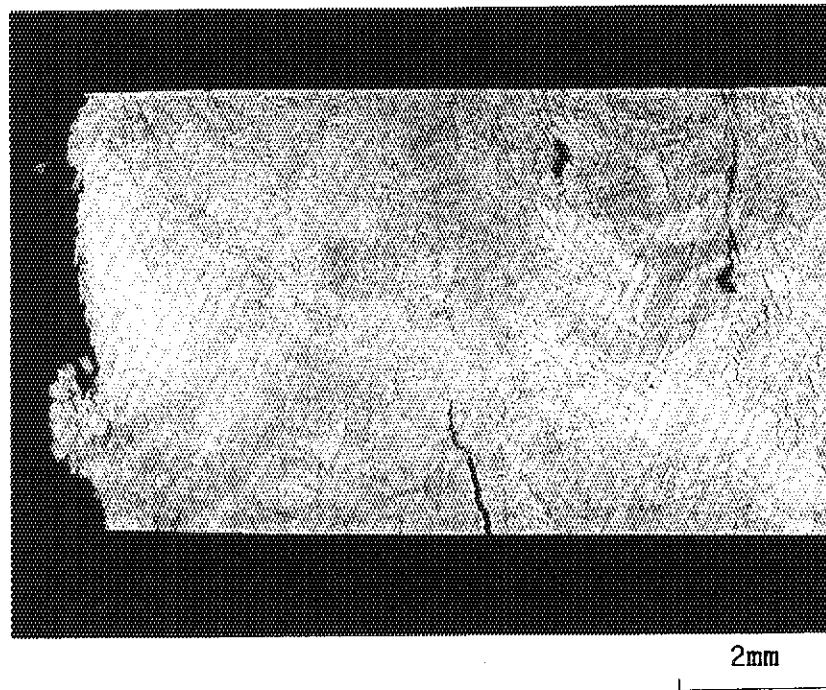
Microstructure of fracture section for Hastelloy XR weld metal (900°C, 2542.3h, 38.0MPa, thickness: 60mm, specimen No.JTC-4)
